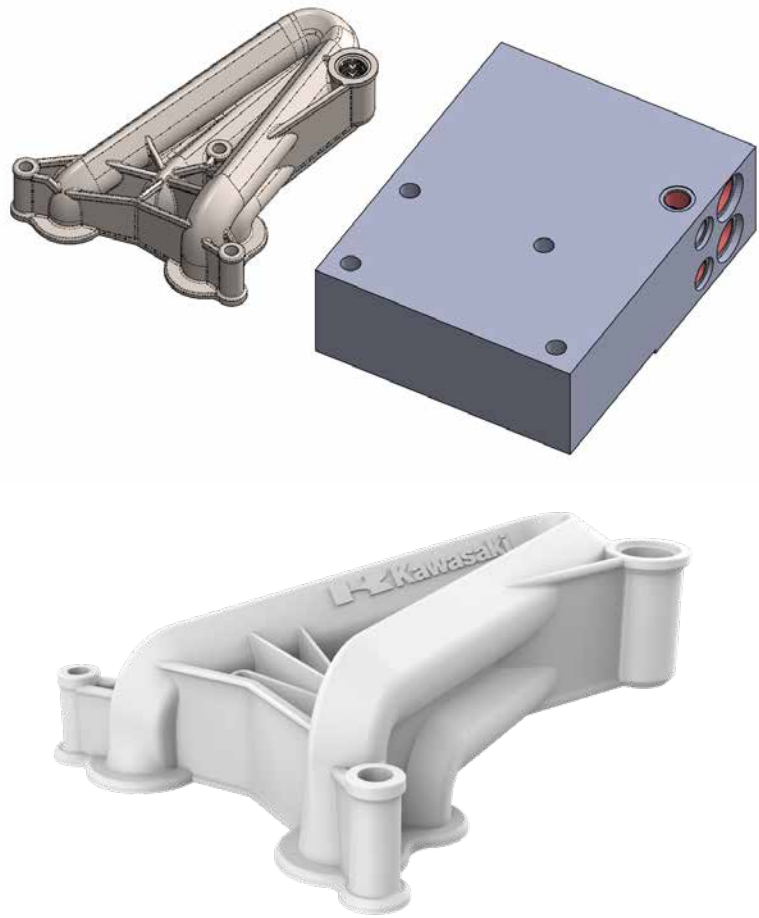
Digital redesign of Kawasaki Heavy Industries' return oil standpipe, consolidating ten components into a single additively manufactured part (Courtesy Pelagus)
